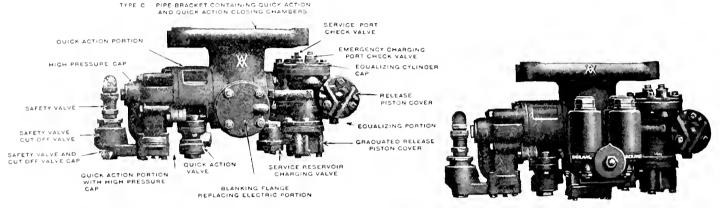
Universal Valve, UC Equipment, Face View, without Electric Magnet Portion
